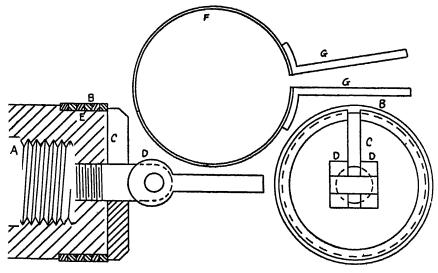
FIXTURE FOR LOCATING PISTON RINGS FOR GRINDING
